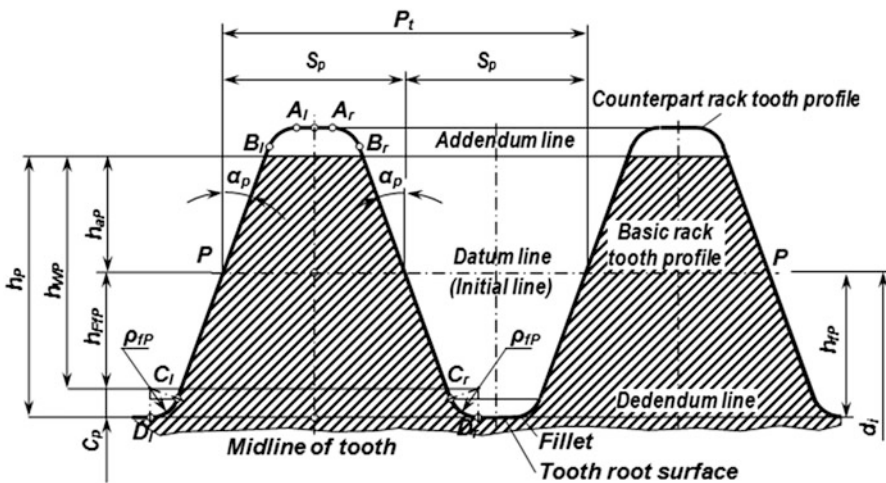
The initial profile of the gear rack for processing gears with an involute tooth profile
